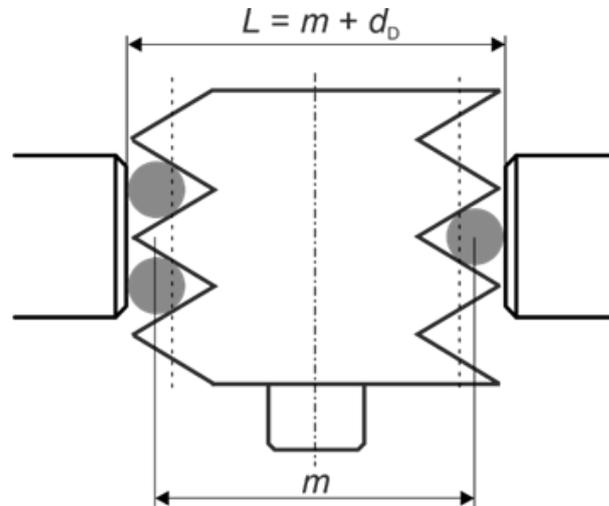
Measurement of the indicated value m on a single-start external thread using the three-wire method
